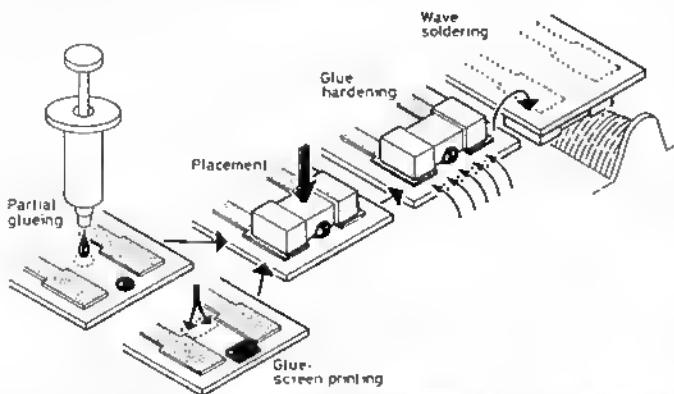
An alternative mounting procedure whereby glue is used to hold the component to the board during wave soldering, making subsequent removal of components rather tricky as it is easy to damage the board
